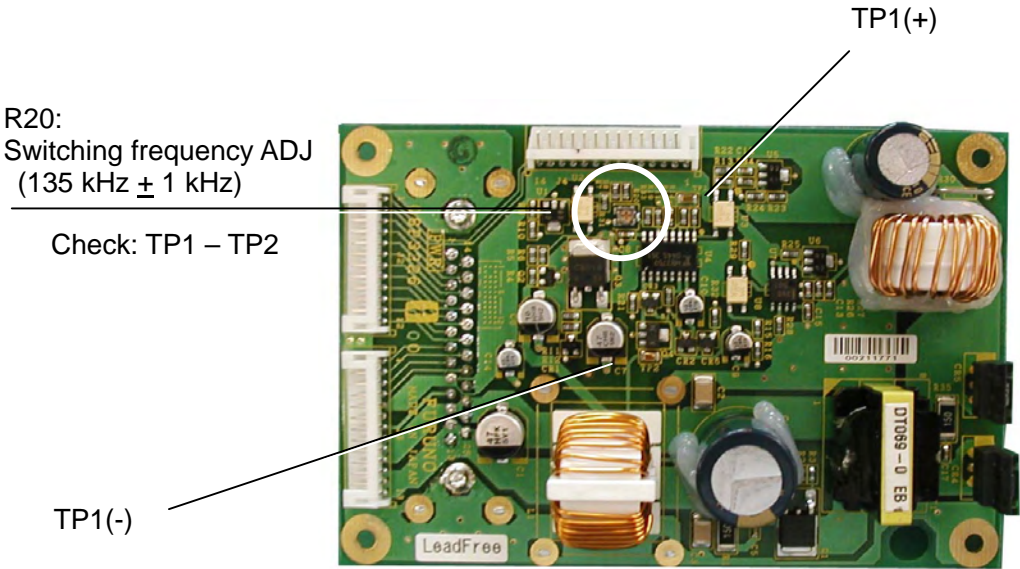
PWR (Printer Power board): 08P3226, side-A
